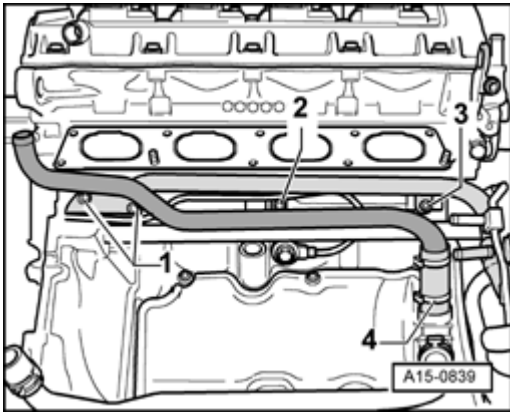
Removing Crankshaft Housing Ventilation Pipe, Bolt And Loosening Hose Clamp
